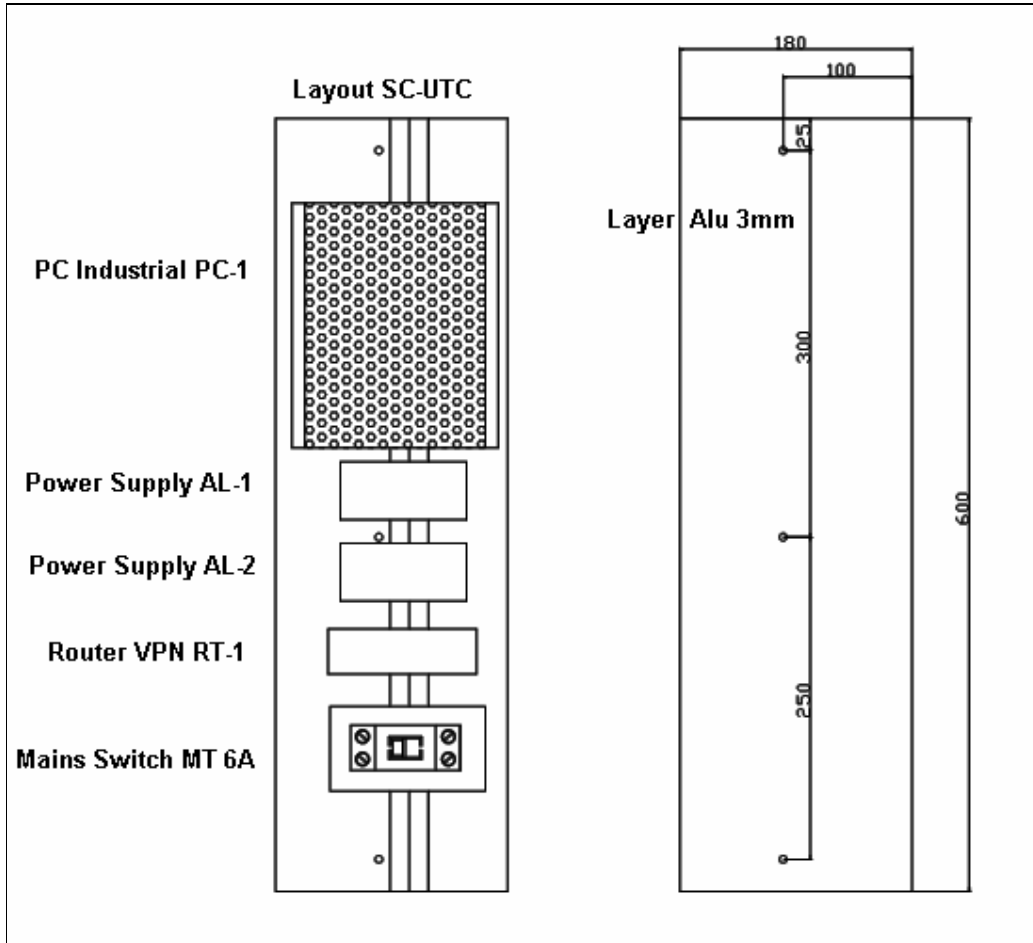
Drawing of the electronic board to be installed in the traffic controller cabinet
